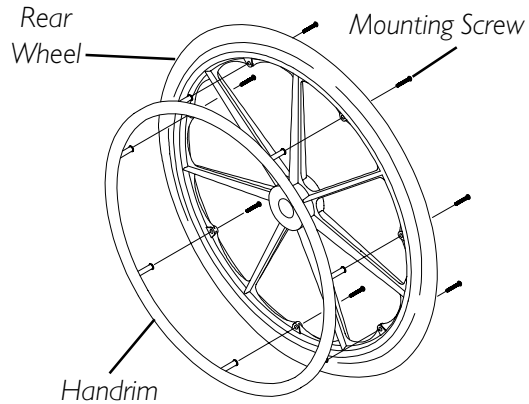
REMOVING/INSTALLING THE REAR WHEELS
